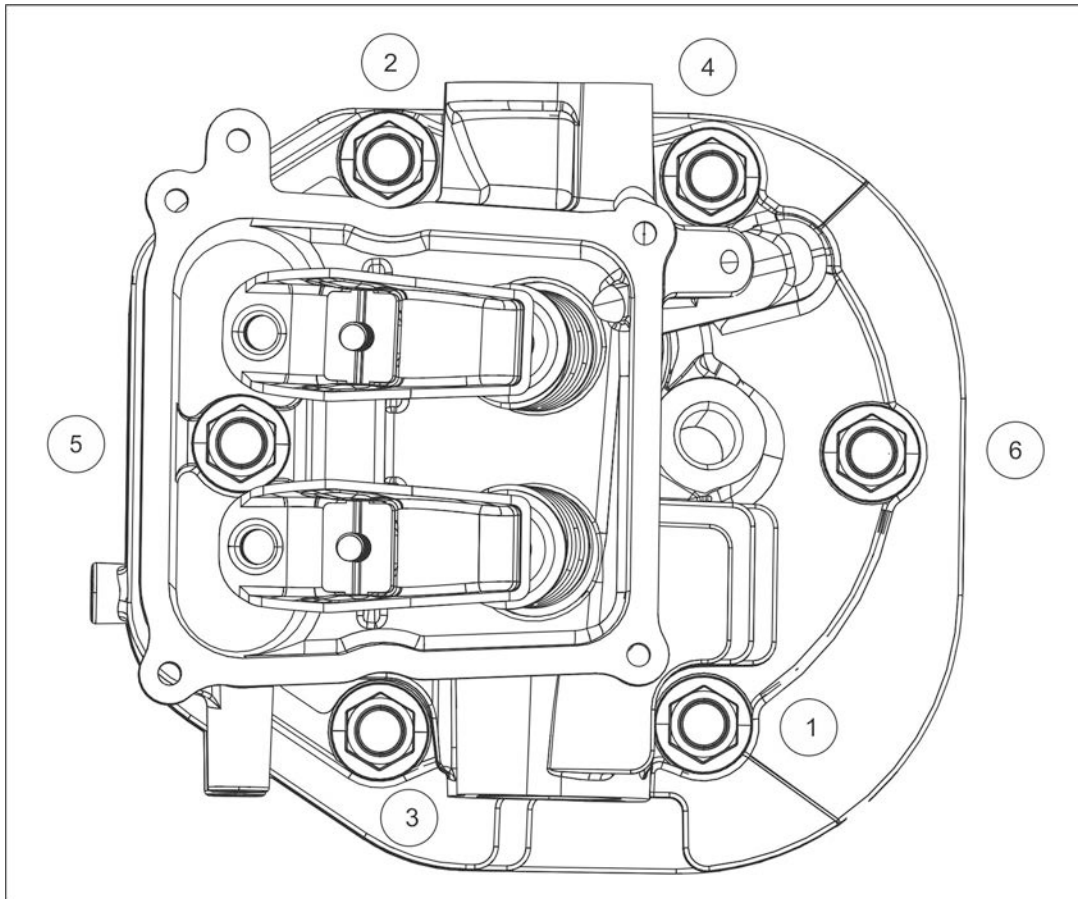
CYLINDER HEAD ASSEMBLY BOLT TORQUE SEQUENCE
